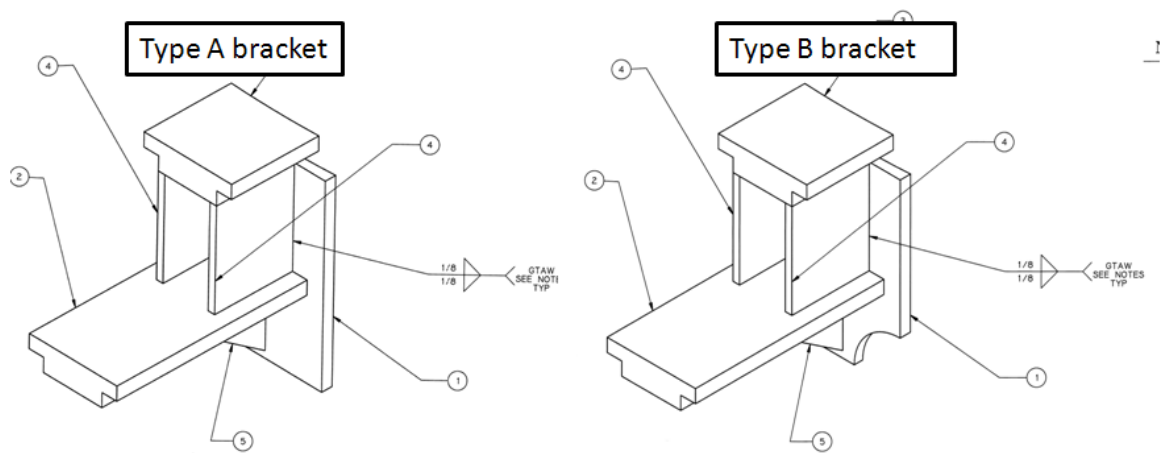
Bracket Types and Weld Specifications
